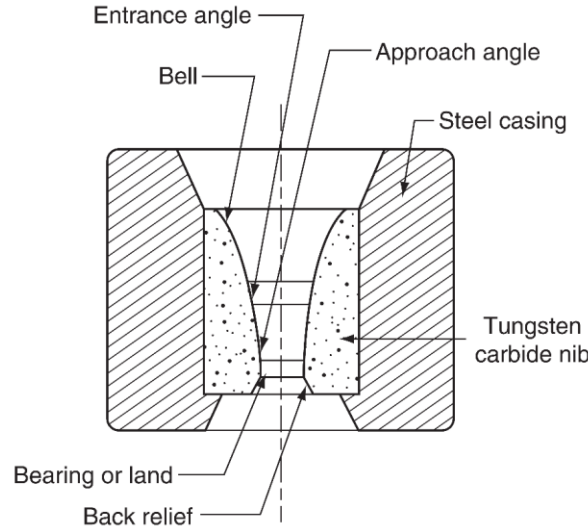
Cross-section geometry of a typical drawing die assembly [46]
